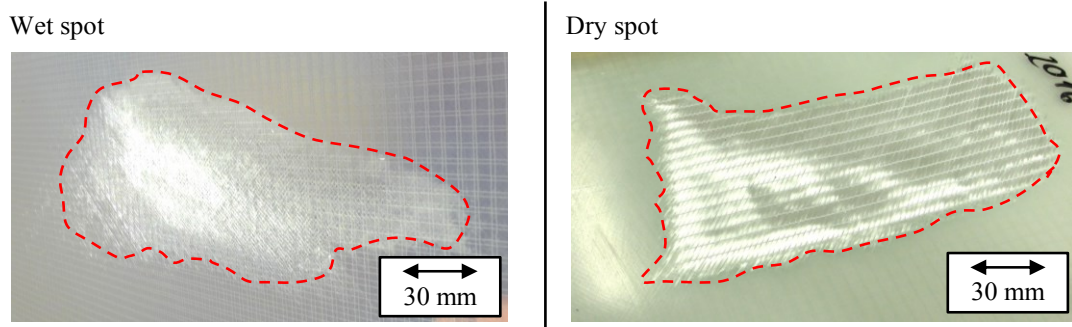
Defects at the FRP plates, optical inspection; wet spot (left) and dry spot (right)
